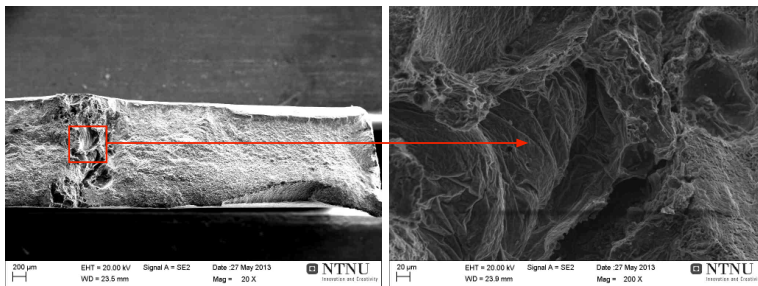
FZ tensile specimen representing the longitudinal direction, showing the fracture surface in the center of the fusion zone.
